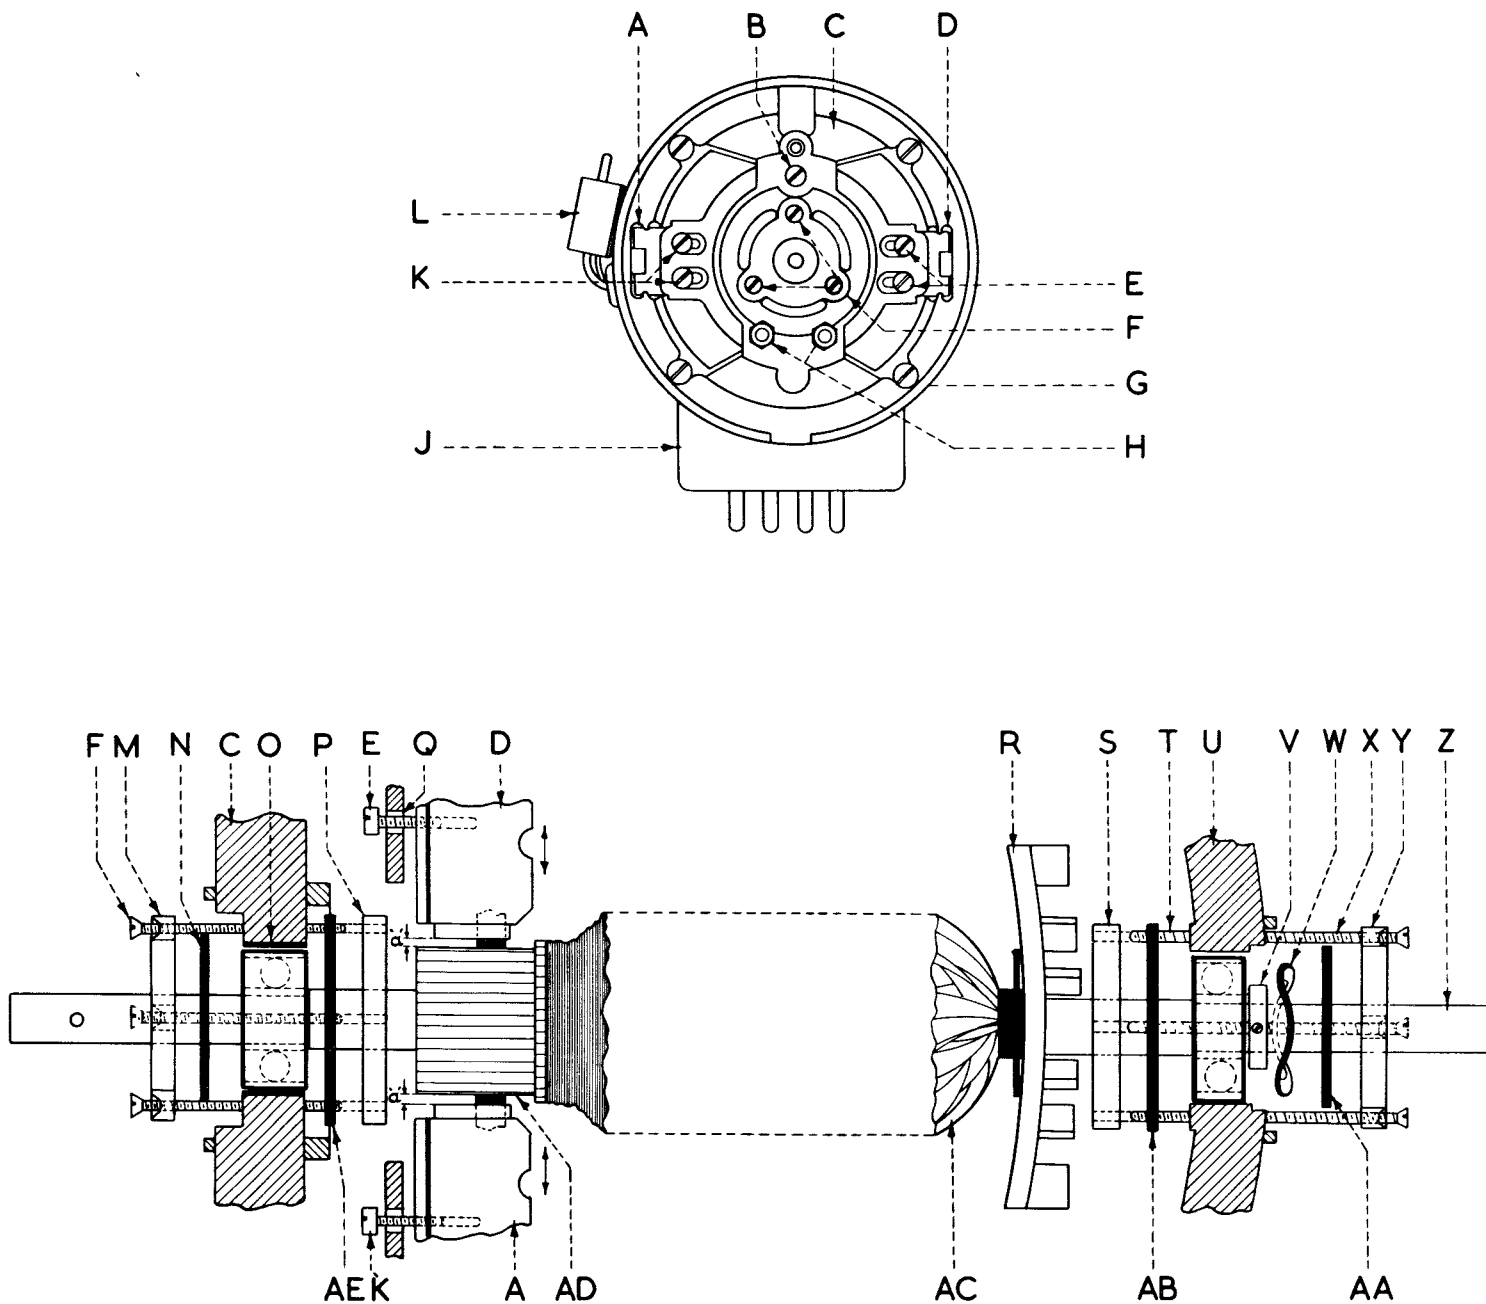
DIAGRAM OF KBE MOTOR DIMENSION
